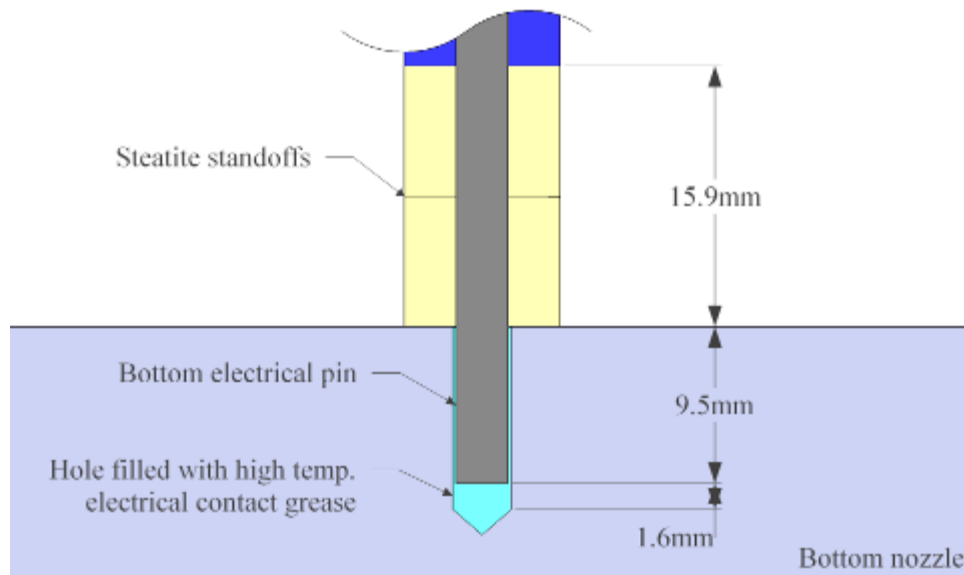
Detail drawing of the bottom of the assembly showing the electrical connection of a single heater rod to the bottom nozzle (neutral)
